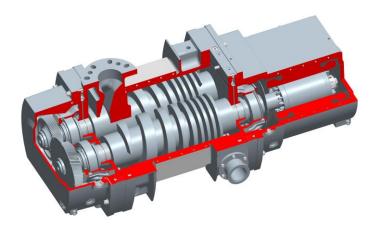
Cross section through a screw vacuum pump with simply supported bearing arrangement and cantilevered motor rotor on a rotor shaft
